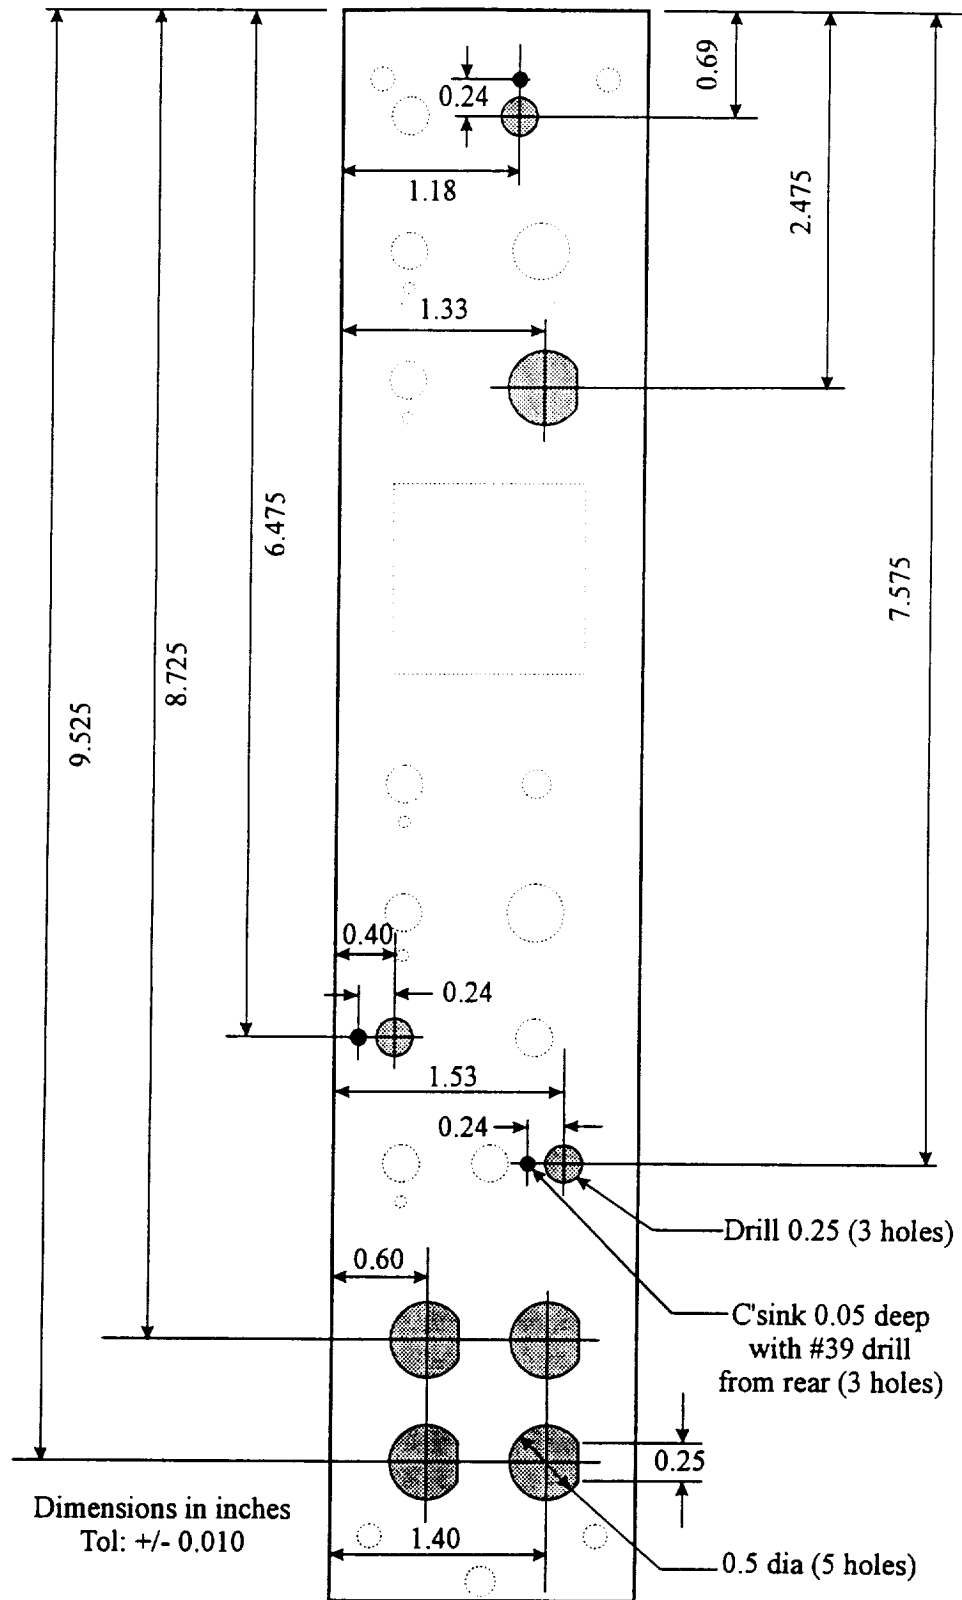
(Continued) Position and size of front panel holes for mounting components.
